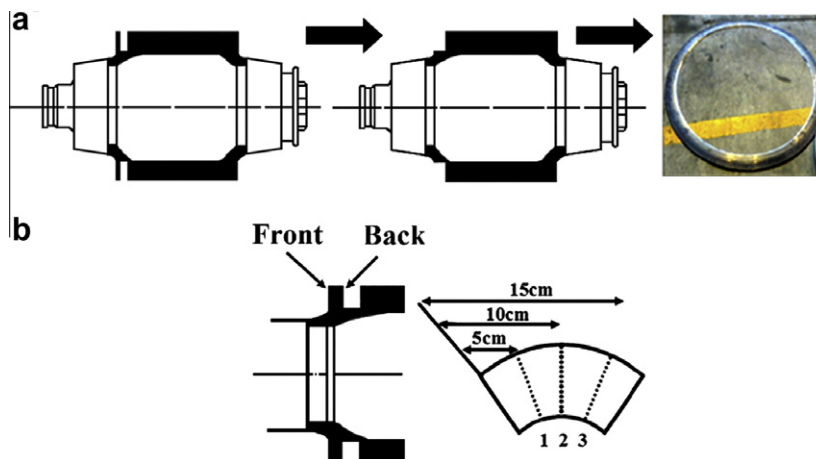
(a) The ring cut from the tandem mill back-up cold roll and (b) samples cut from the sector of the ring.
